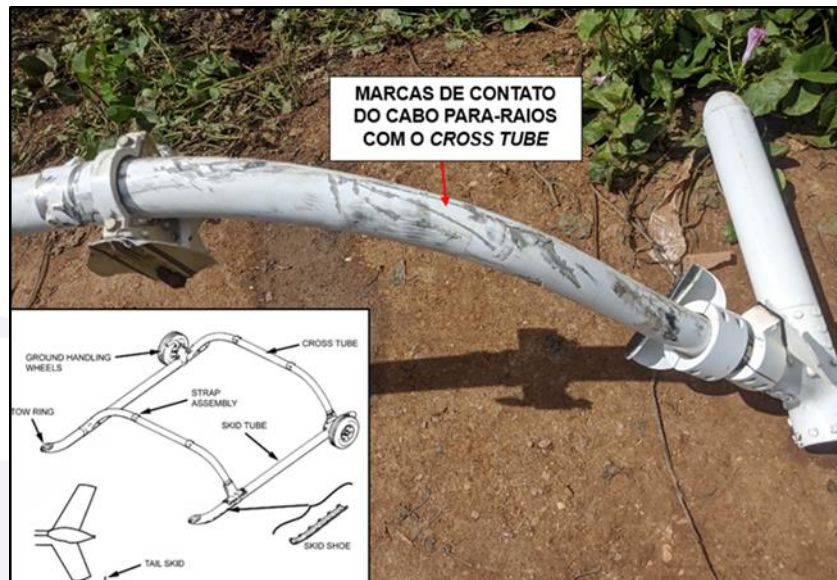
Lightning-rod cable markings on the rear cross tube.
